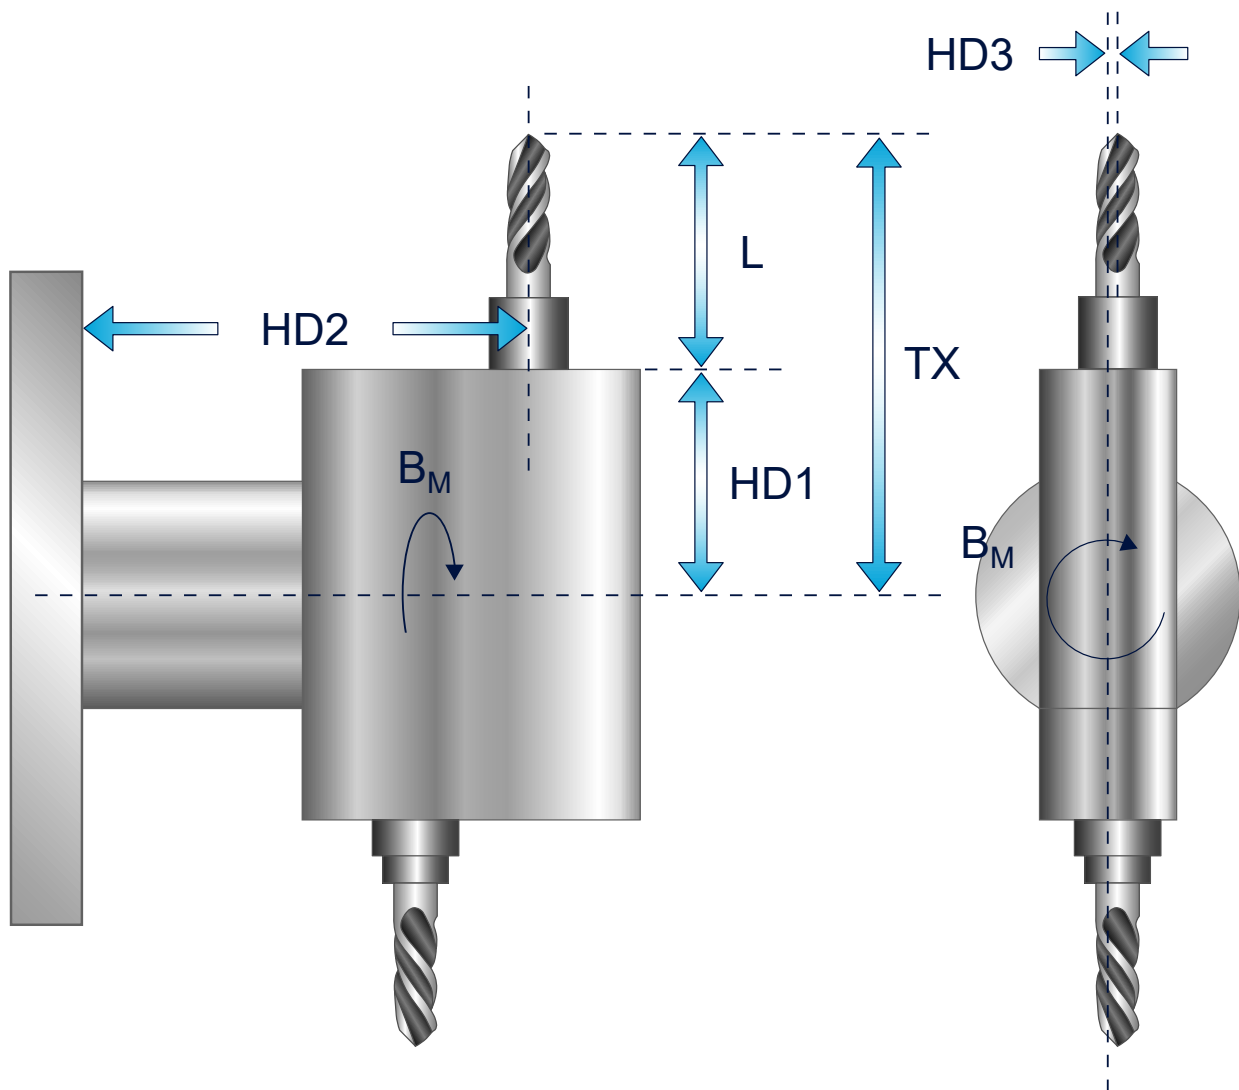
Side view and front view of the double spindle head (upper spindle)
